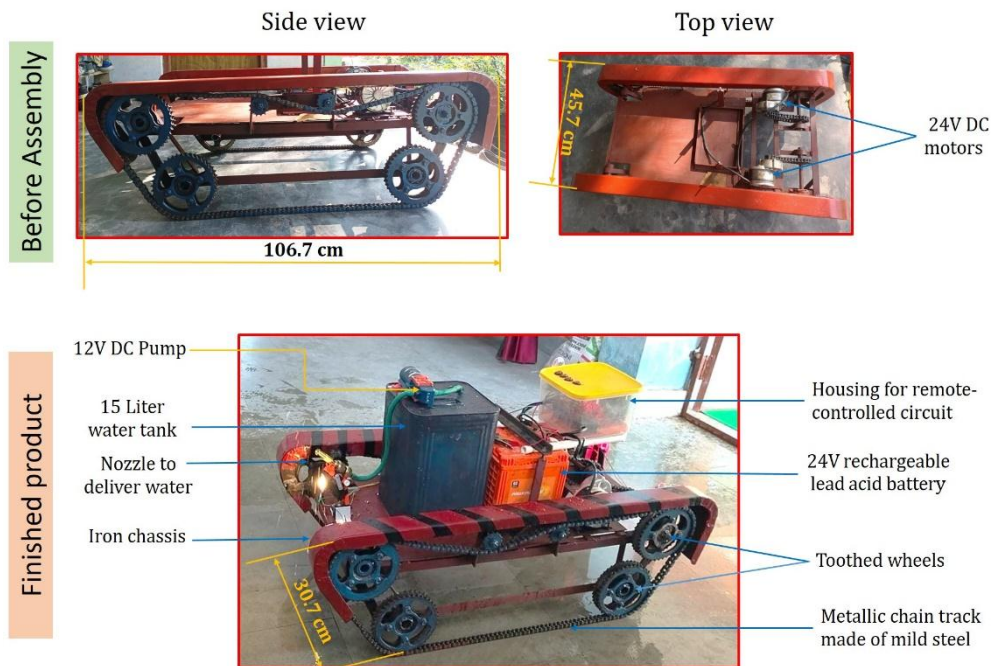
Illustration of different parts and dimensions of a remote-controlled firefighting vehicle.
